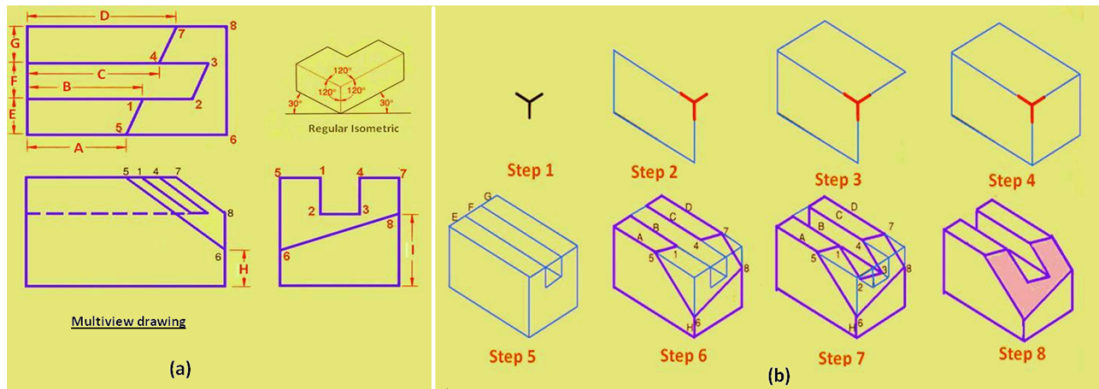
shows the (a) multiview drawing of an object and (b) the stepwise procedure for drawing the isometric view.
